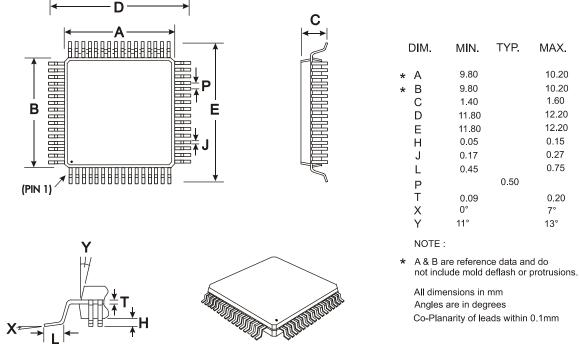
Mechanical Outline of 64-pin LQFP (L9)
